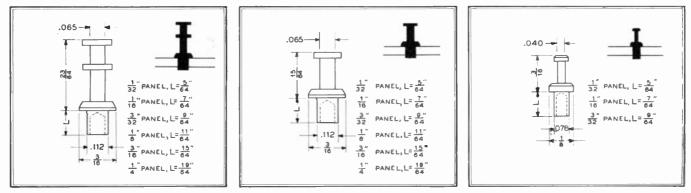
DIMENSION DRAWINGS AND ACTUAL-SIZE SILHOUETTES OF THREE STANDARD TYPES OF SINGLE-ENDED TURRET LUGS
